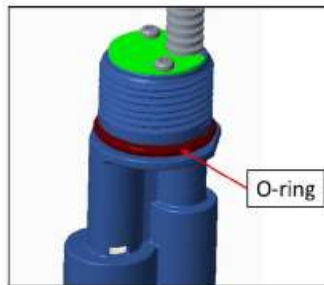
Ensure that an O-ring is installed on the new Tri-Function Sensor.
